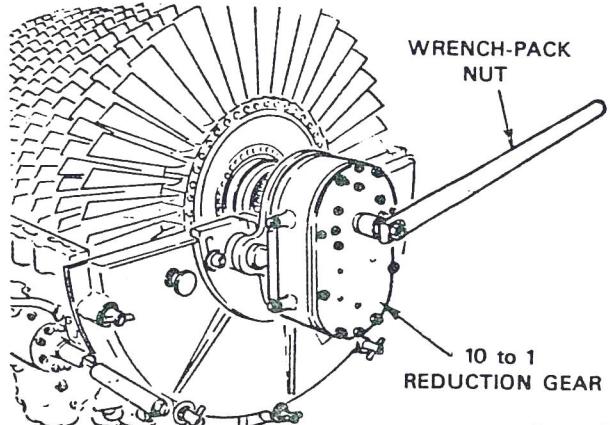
10 to 1 Reduction gear and wrench fitted to adapter plate
